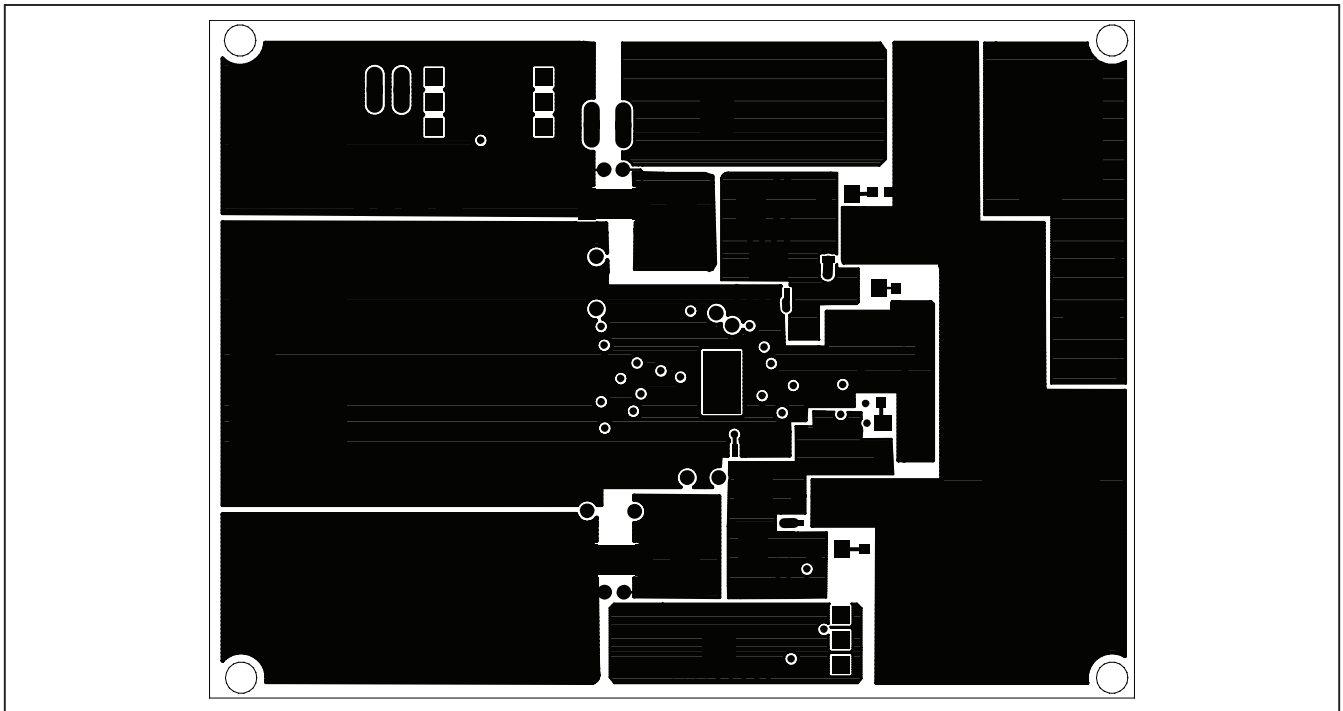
MAX15034B EV Kit PCB Layout—Component Side
